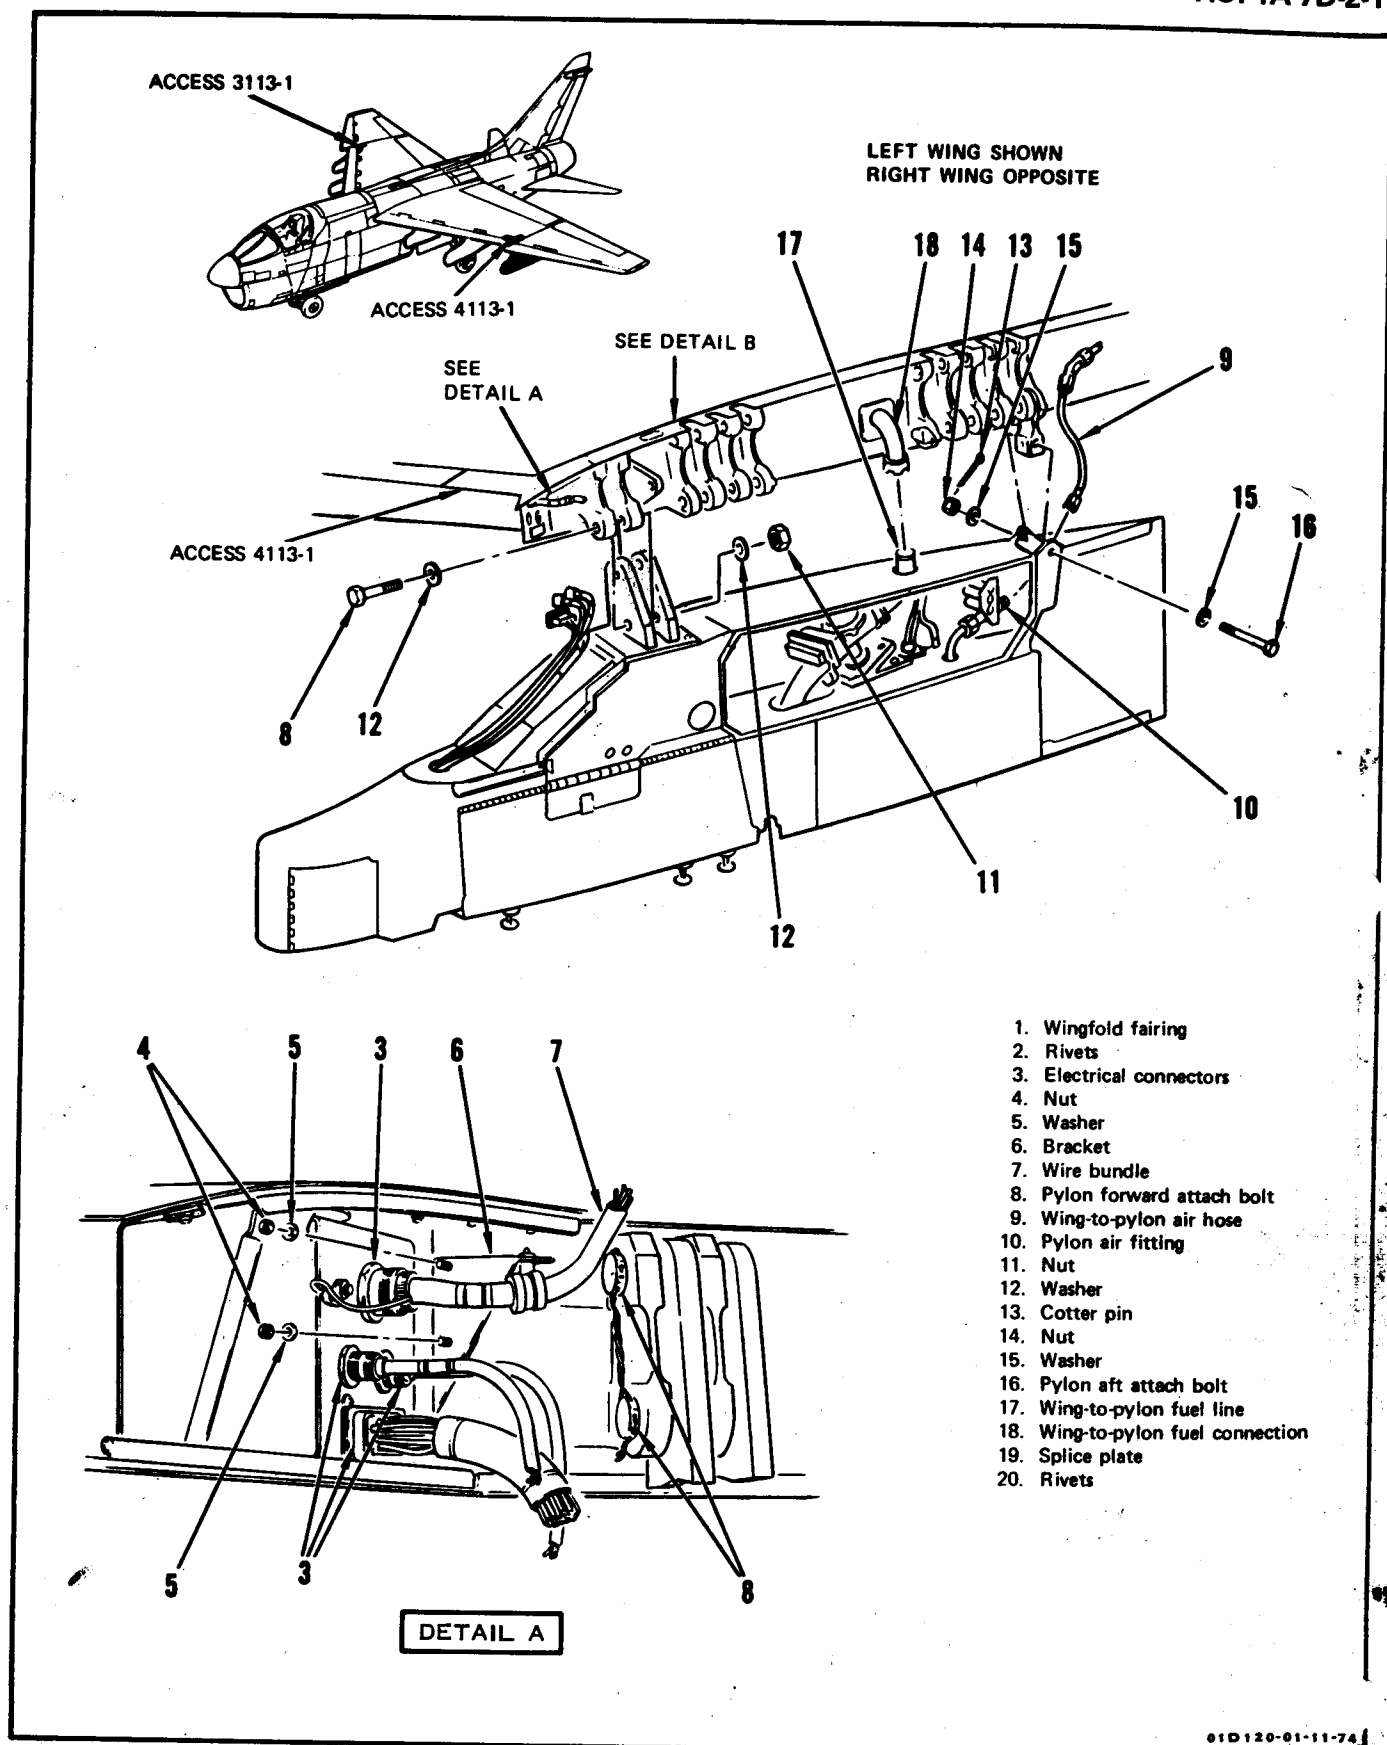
Outboard Pylon Removal with Wings Spread (Sheet 1)
